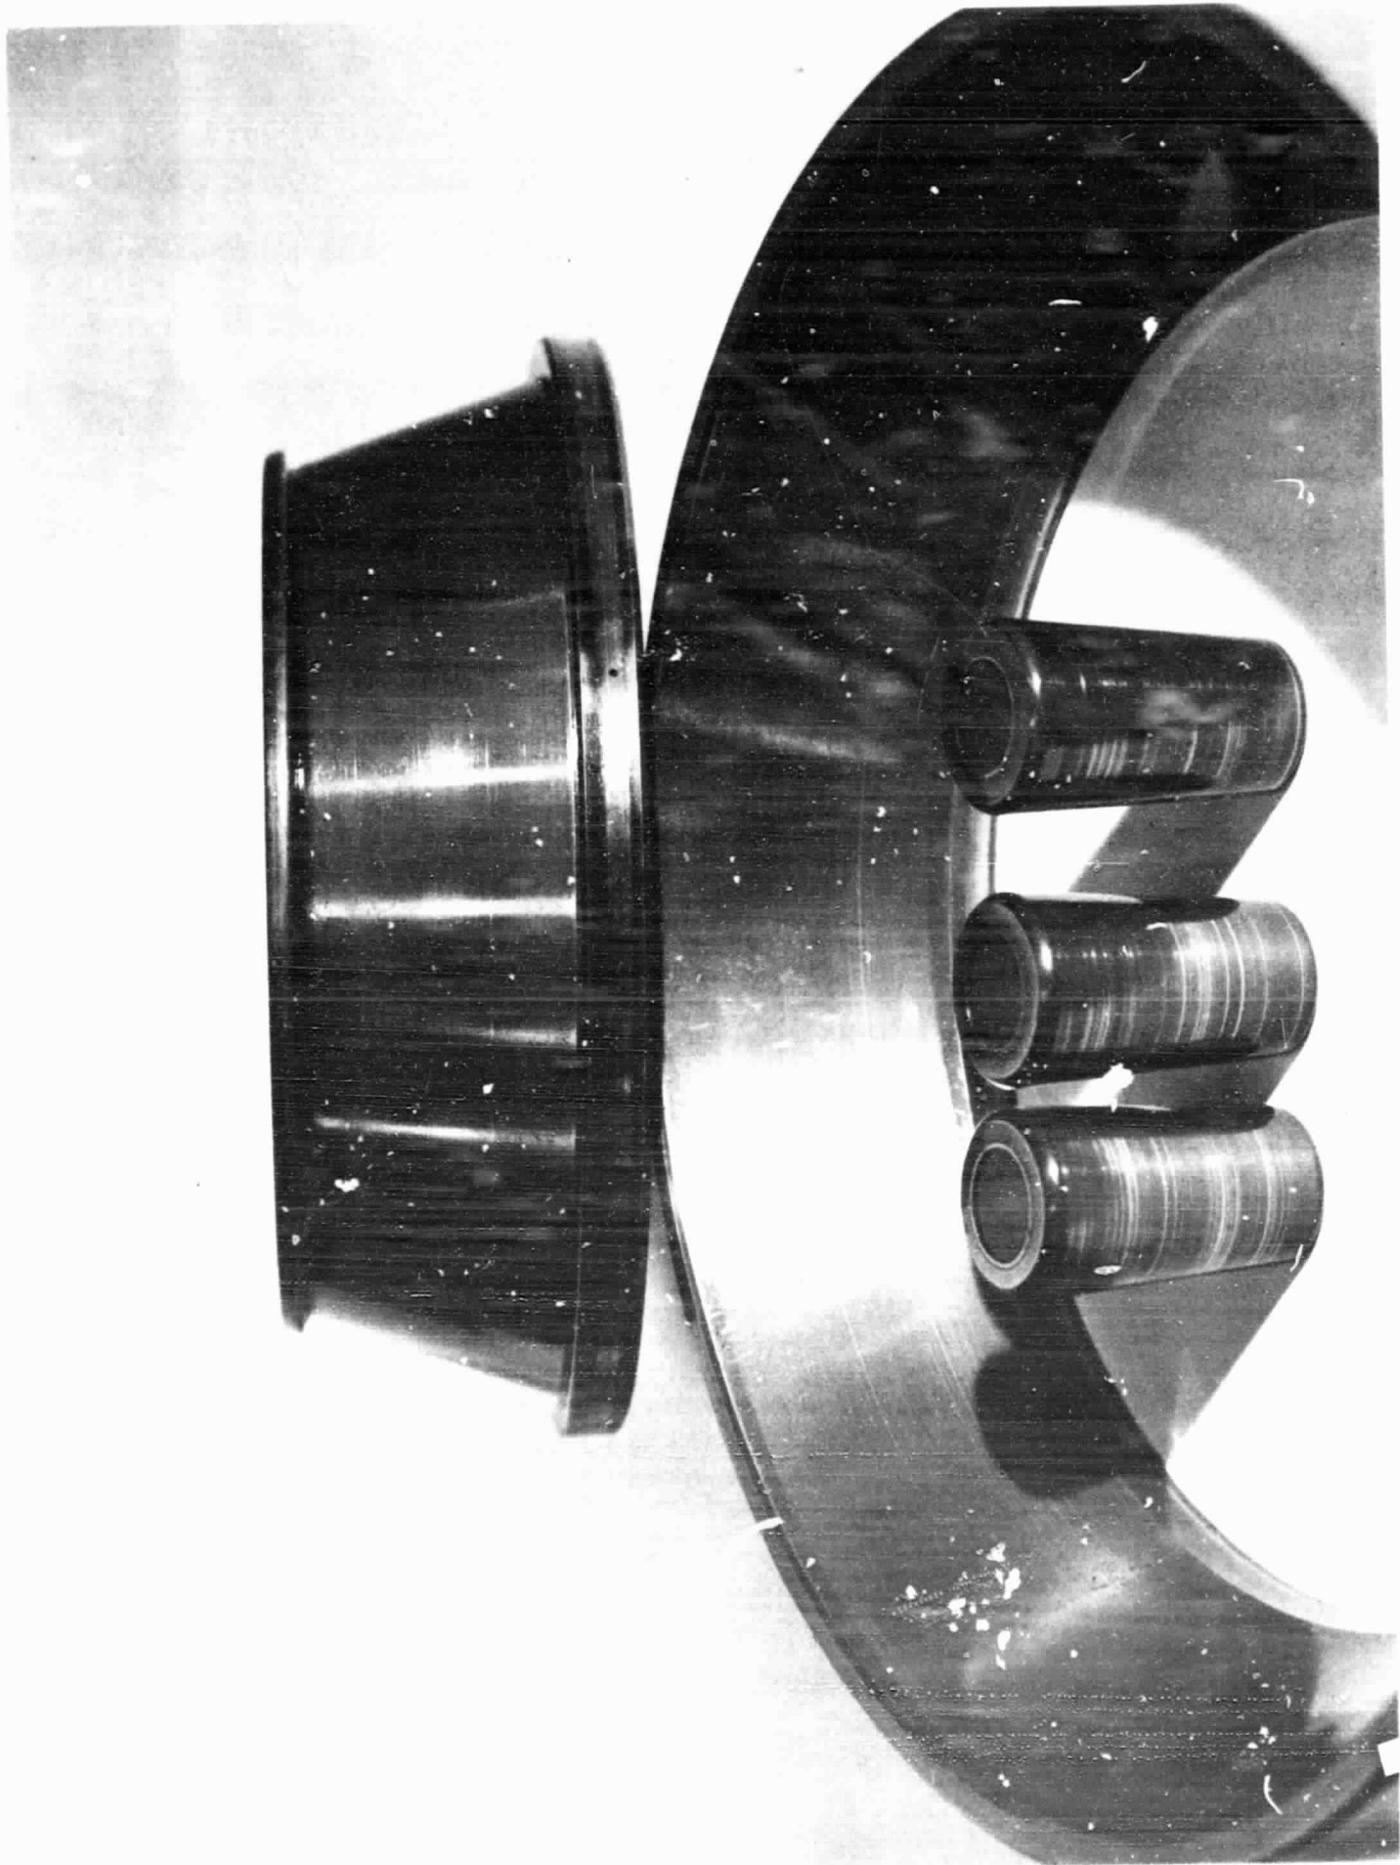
PINION INBOARD BEARING - CUP, CONE AND ROLLERS
